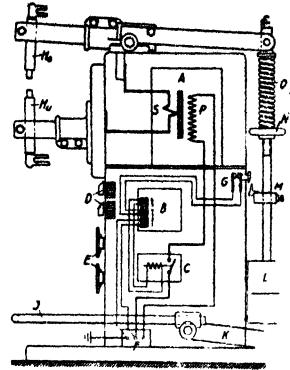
Wiring diagram of the transformer-type spot welding machine (Schlatter, Zollikon).
